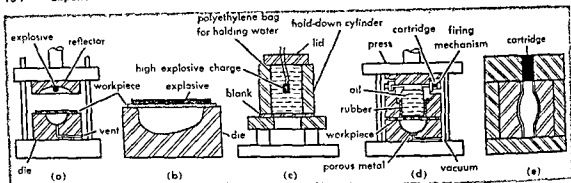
Five methods of explosive forming (a) Shaped charge and parabolic reflector. Shock and pressure are the motive power. Reflector and charge must be shaped to direct explosive force toward the workpiece. (b) Flat high explosive is simply placed on top of sheet which lies on female die. Forming over a punch produces wrinkles. (c) The hold-down cylinder is often a carton of water or a bolted ring on lower die. (d) Gun
